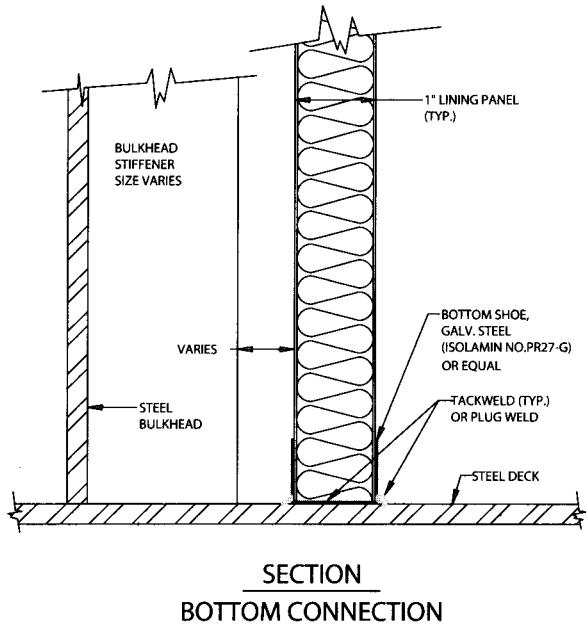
(b) (continued) Typical Joiner Linings and Ceiling Details—Joiner Bulkhead and Lining Details
